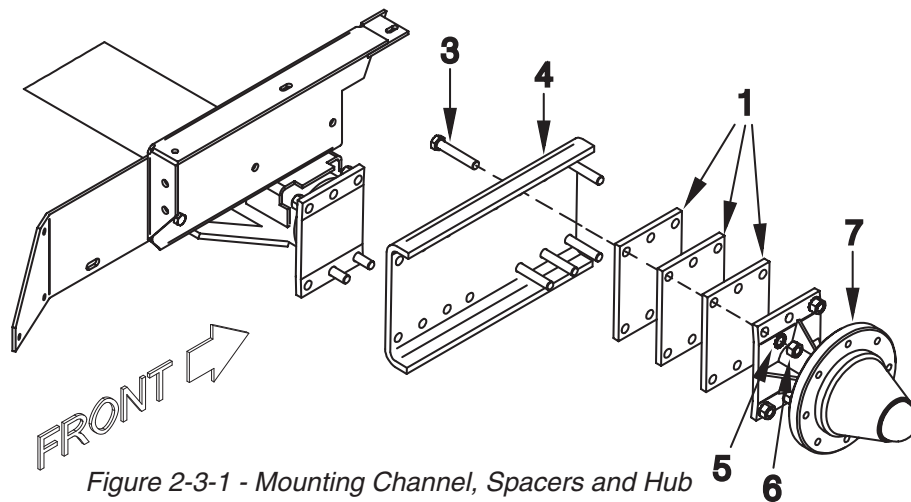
Mounting Channel, Spacers and Hub
